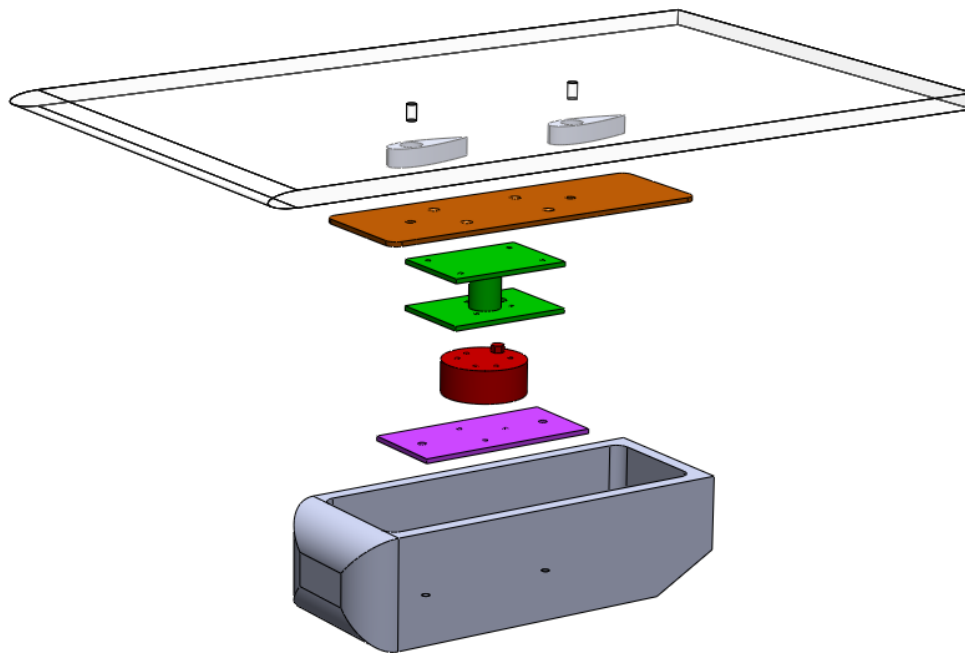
Assembly drawing for force measurement with the Ahmed body. The lower mounting plate (pink), ATI force balance (red), and upper mounting plate (green) remain as one piece. These are bolted to the base of the Ahmed model. The lid (orange) is then attached to the top of the upper mounting plate. Bolts pass through the ground plane, through the airfoil sheaths, and into the lid.
